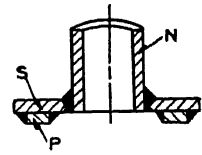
Welded Nozzle with Inner-reinforcing Plate.
